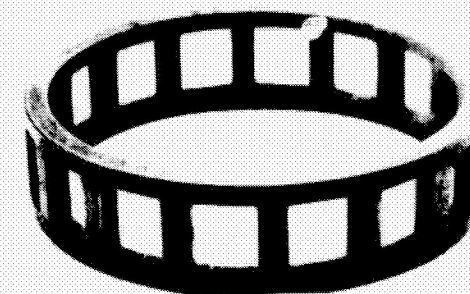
Satisfactory Appearance of Loader Roller-Bearing Retainer S/N 880005 After Second Test Segment
